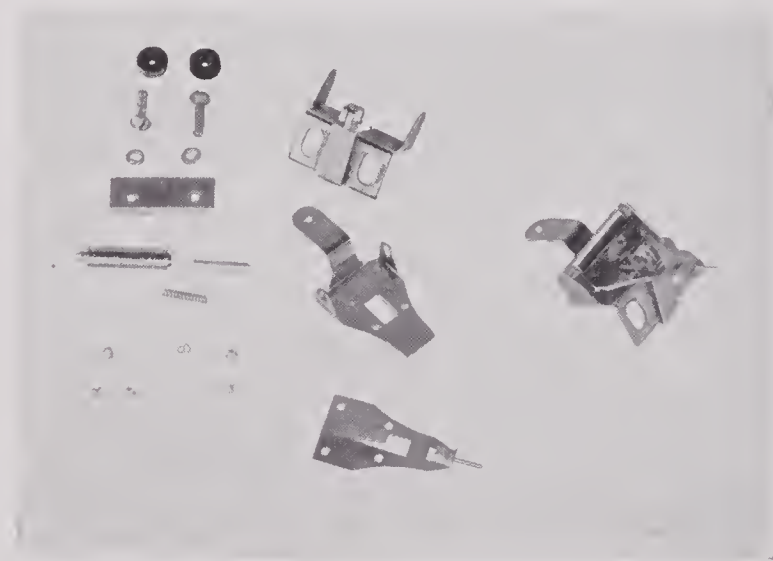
Components of gyro contact arm. (Assembled contact arm shown at right.)
